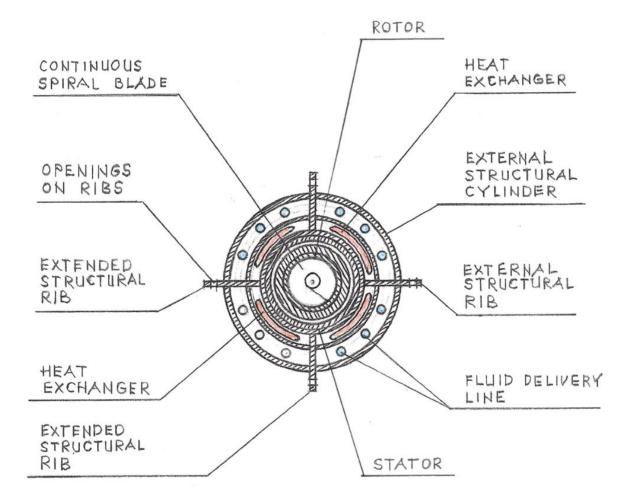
Cross-sectional View of an Excavation Line of the apparatus for Drilling Faster, Deeper, and Wider Wellbore
